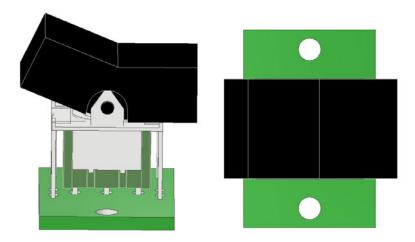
Rocker switch and PCB assembly isometric (left) and top view (right)
